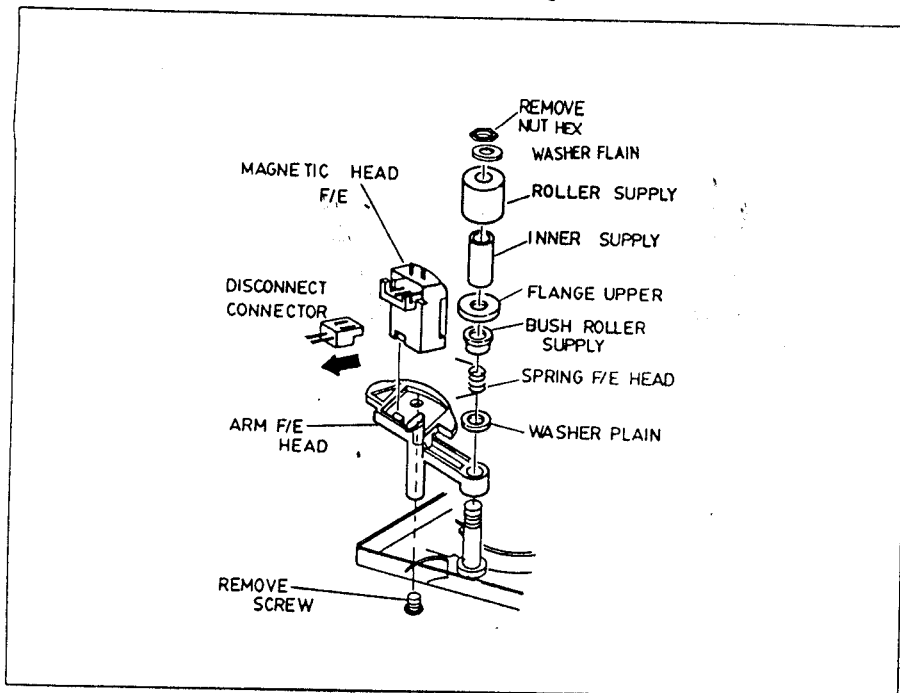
Full Erase (FE) Head/Supply Roller Removal
